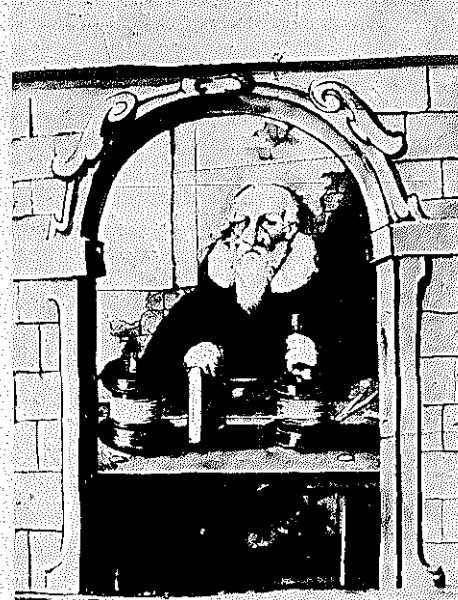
A Medieval Drawing Bench for Fine Wire (from *Mendelsches Stiftungsbuch*)
